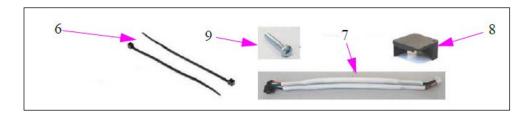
Cellular Modem Module Assembly Parts (10)
